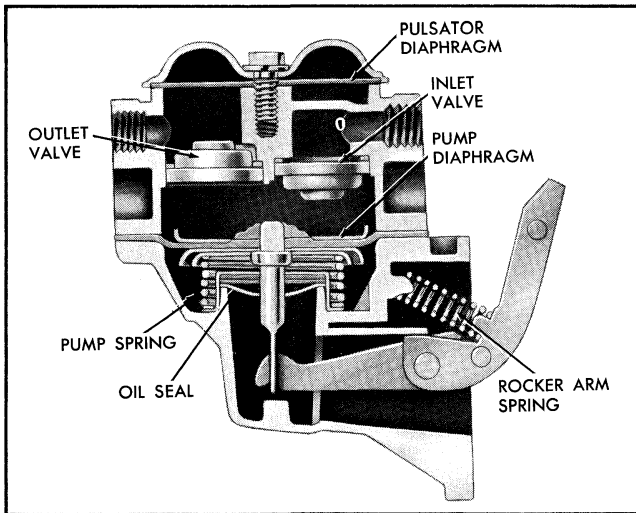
B-102 Schematic View of Fuel Pump 6 Cyl.
